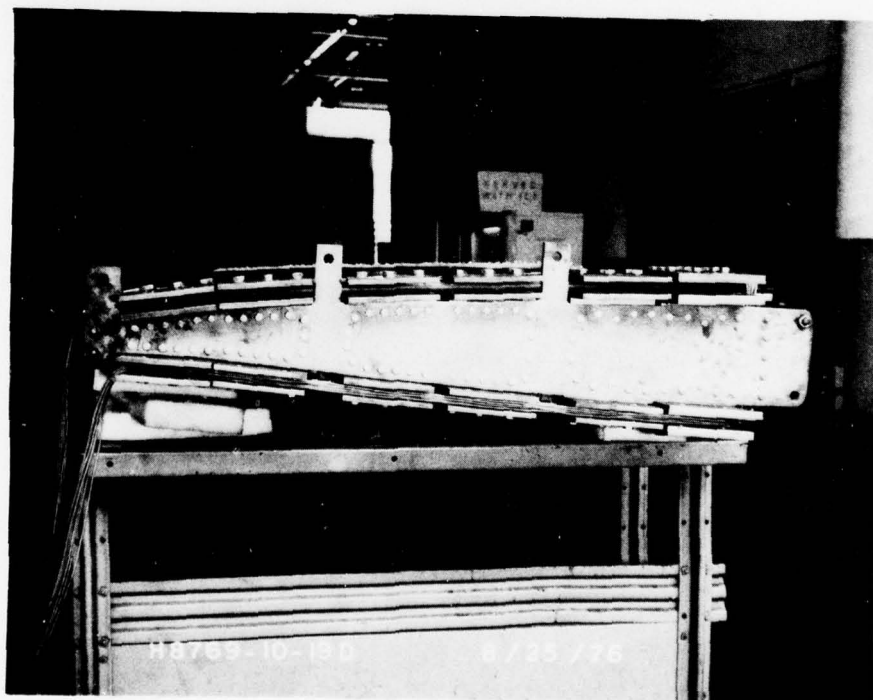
Composite Wing Box Assembly - View of Outboard Loading Fixture
